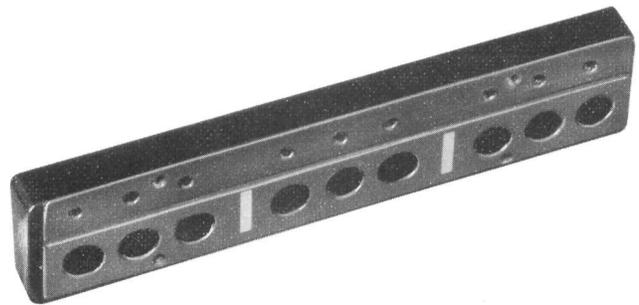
B—KS-21315 L7 Jack Mounting Insert Used for Test Trunk Appearance Requiring Lamps (See KS-21315 L4)
